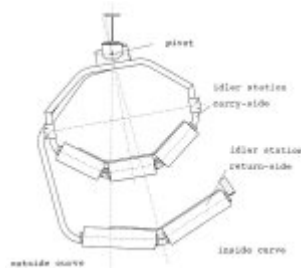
Carry-side and return-side idler support frames of the belt conveyor
